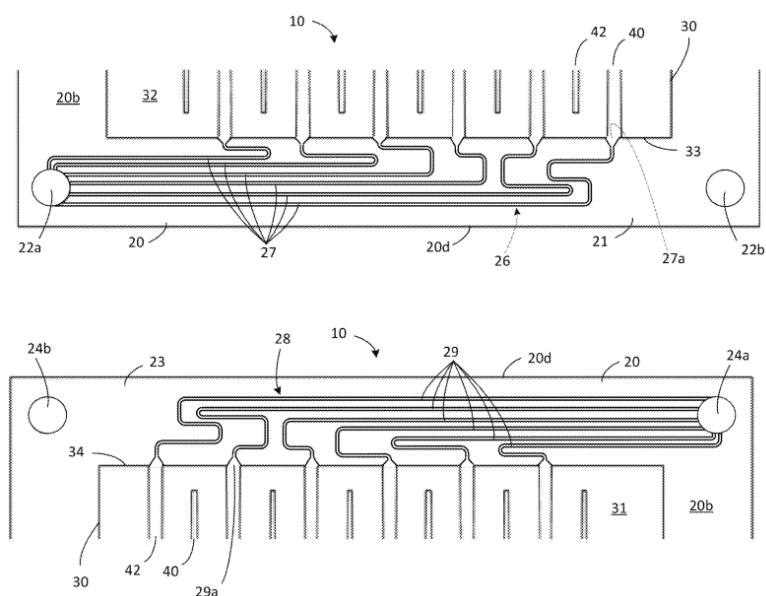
Detailed view of the inlet and outlet manifolds [29]
